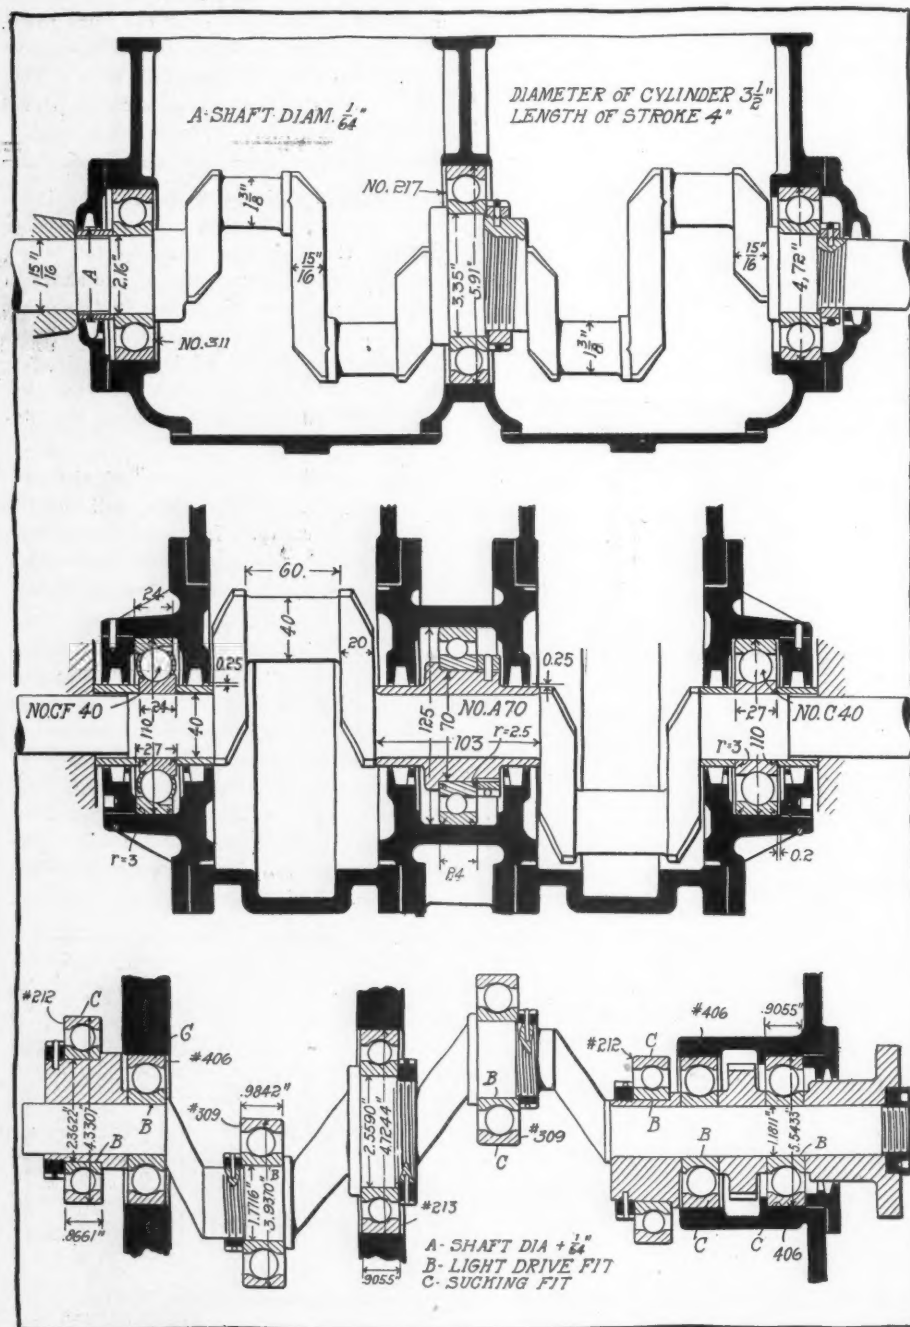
THREE BEARING CRANKSHAFT WITH VARIATION IN SYSTEM OF LOCKING BEARINGS
